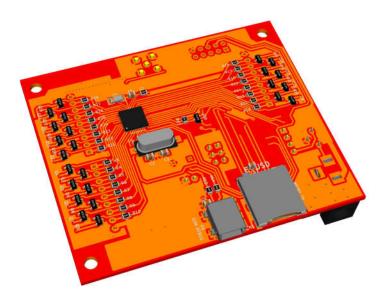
Major parts presentation of GSM Remote I/O kit. (BottomView)
